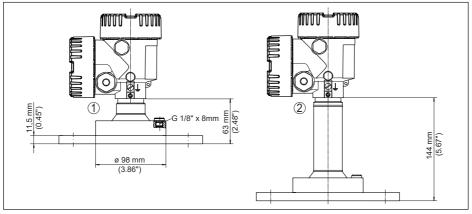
NCR-86, flange with lens antenna (flange thickness acc. to drawing, flange dimensions acc. to DIN, ASME, JIS)
